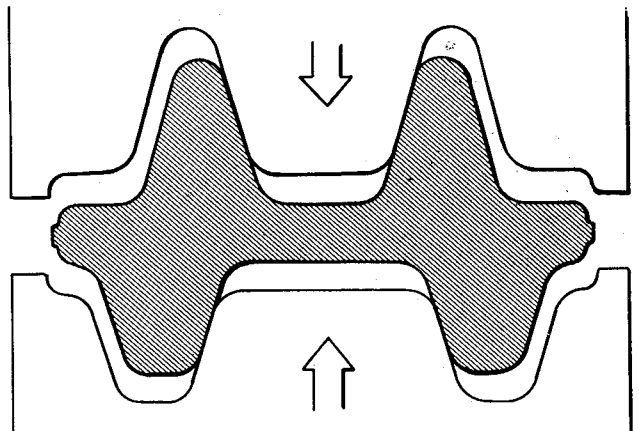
Cross section of a forging being cold compressed in the forging tool.
